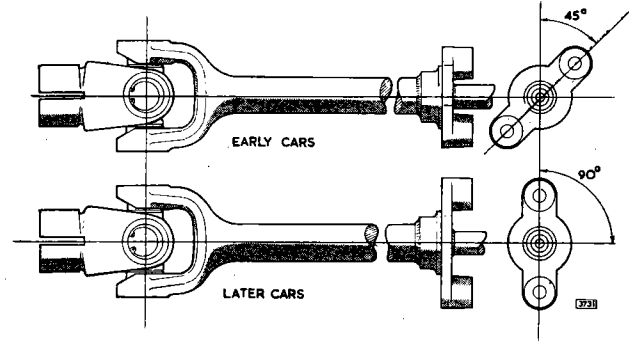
Showing the 45° and 90° phased lower steering columns
